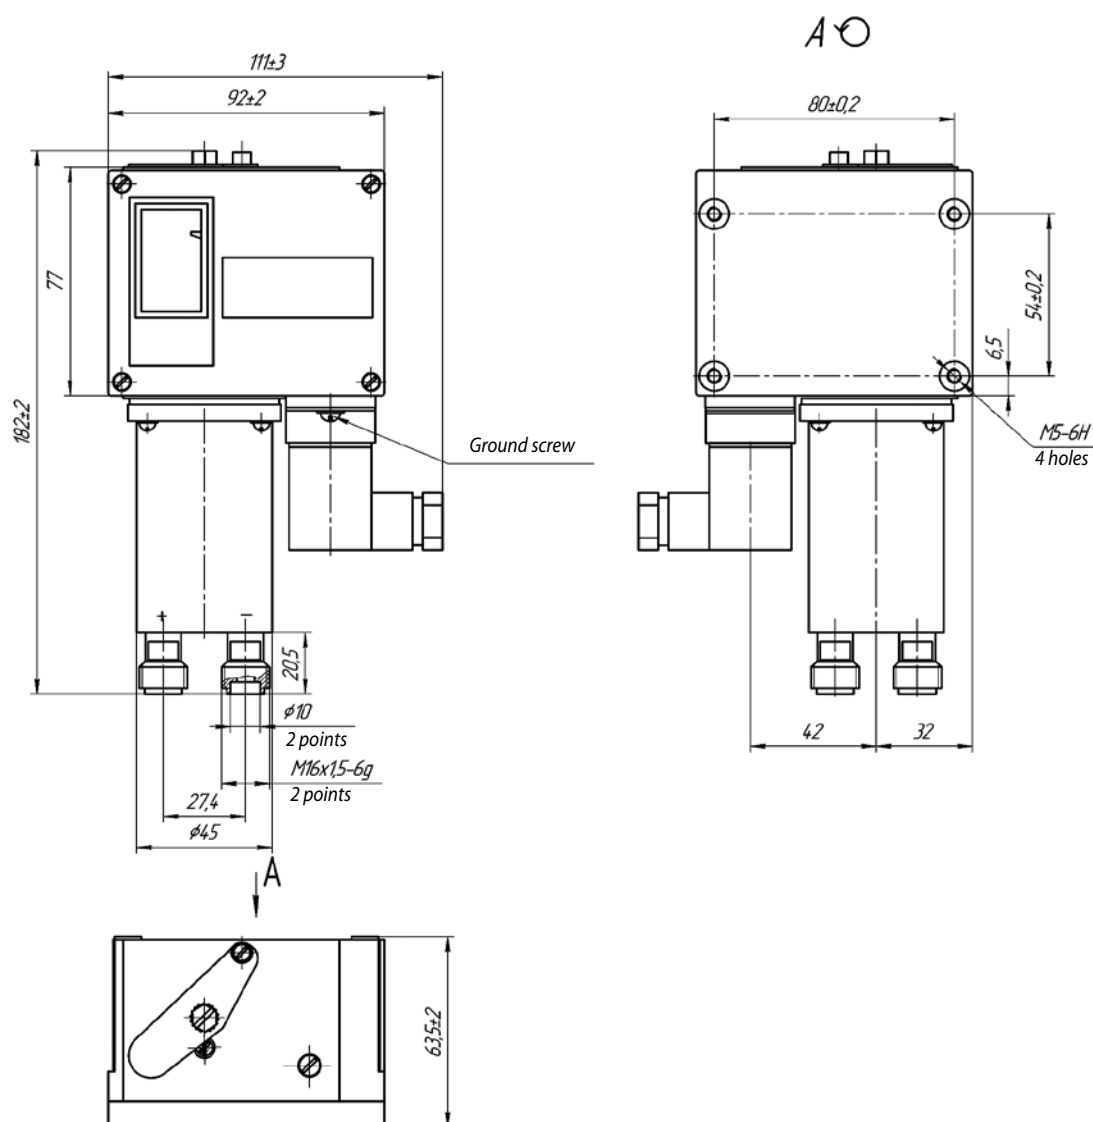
Overall and mounting dimensions of ДЕМ-202C
